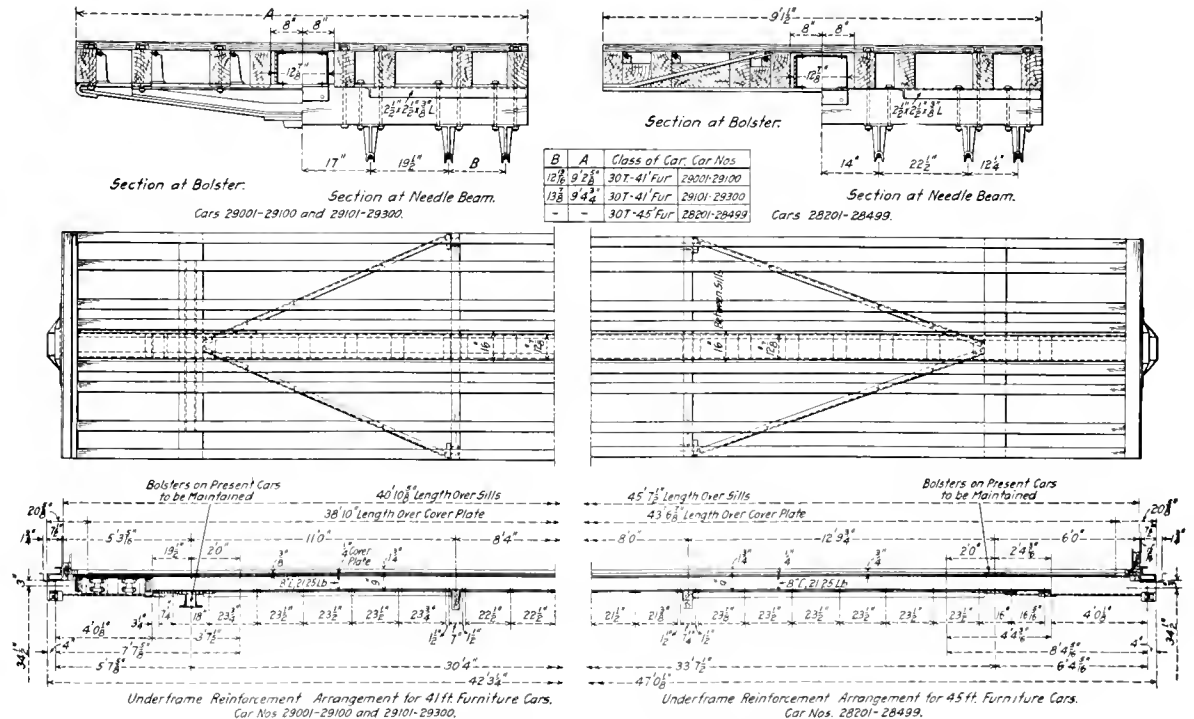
Underframe Reinforcement for Long Wooden Furniture Cars
